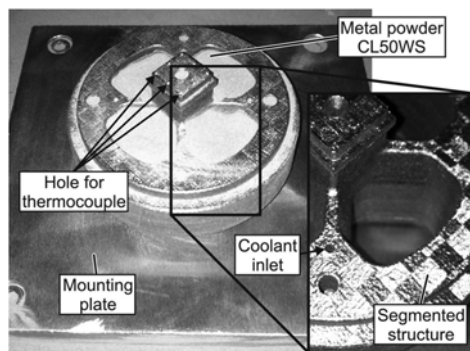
Mandrel part of the extrusion die manufactured by selective laser melting
